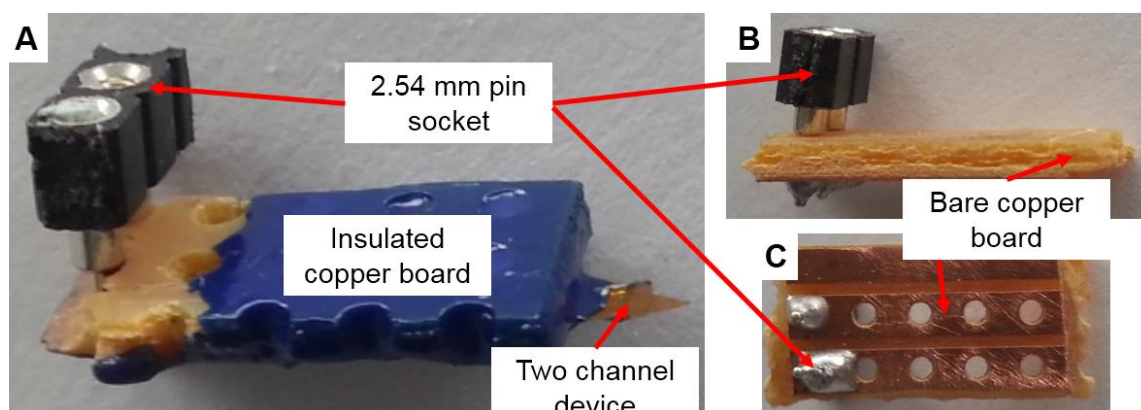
A) Two channel electrode secured to insulated section of copper board side view, B) bare copper board side view, C) bare copper board bottom view.
